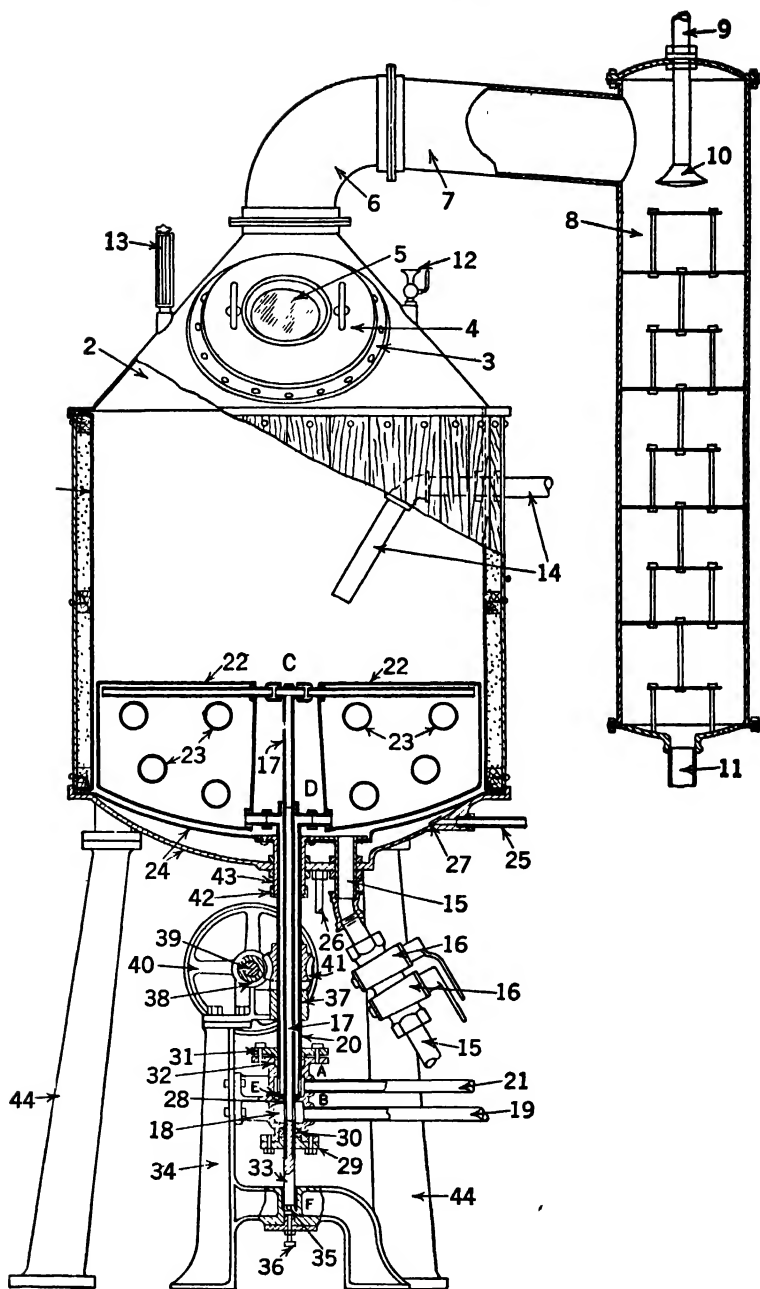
VACUUM EVAPORATOR AND ENCRYSTALLIZER.
